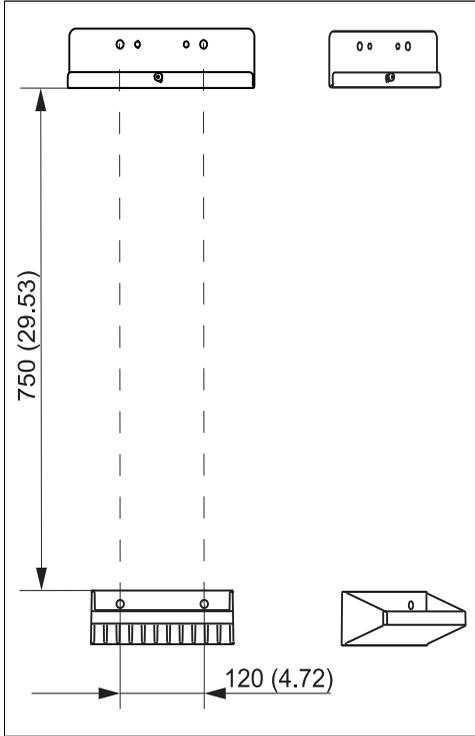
Holder unit dimensions. Engineering unit mm (in).
